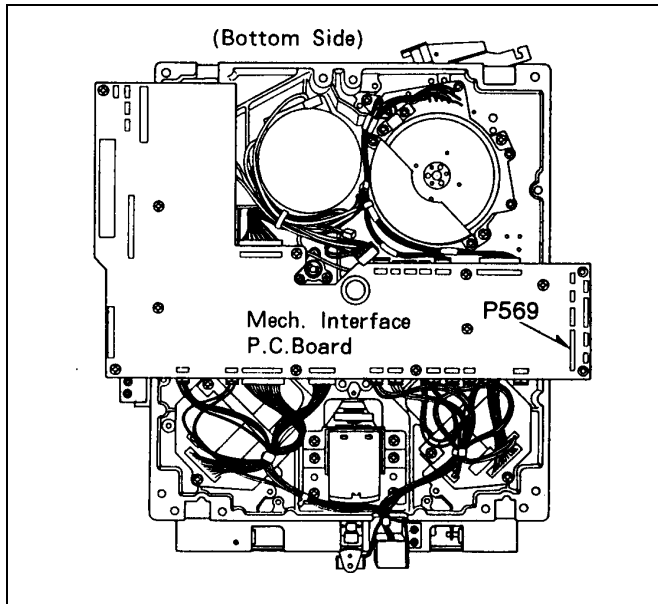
Pinch Solenoid Connector (P569) Removal
